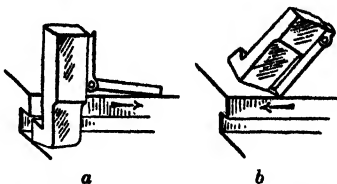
This figure shows tool lifter: (a) cutting stroke; (b) return stroke.
